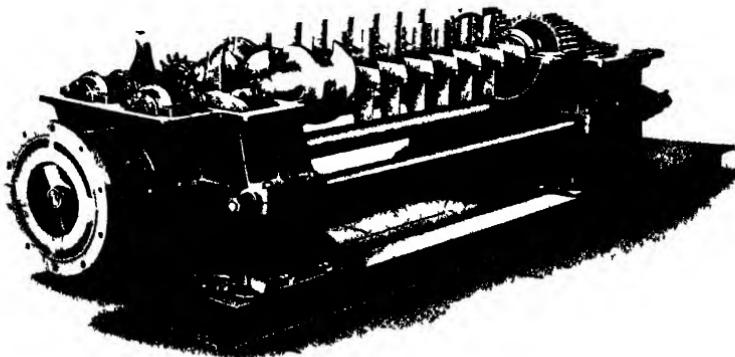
Combination Pug Mill and De-airing Auger Machine
